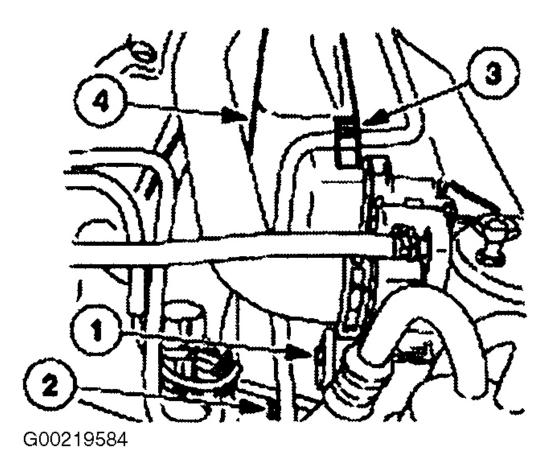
Removing/Installing Upper Fan Shroud Bolts Courtesy of FORD MOTOR CO.
